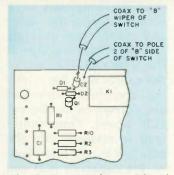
Corner of top side of control board showing location of C2 and coax cable connections.
